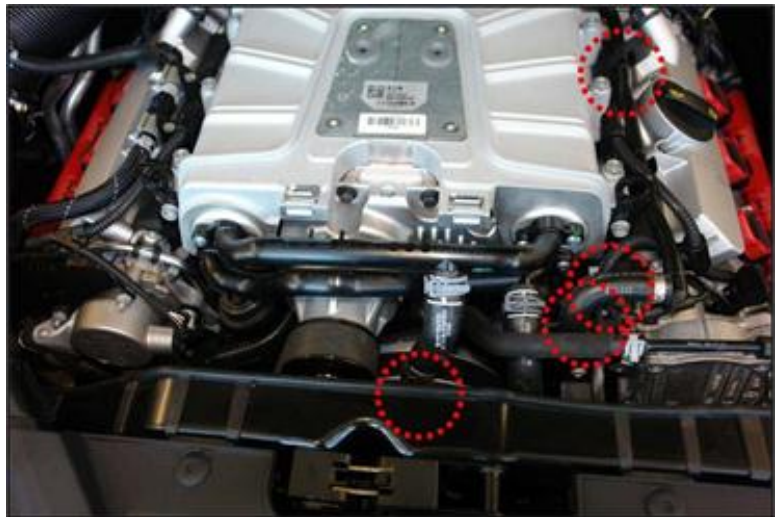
Screw to be removed from coolant line and upper section of oil pan (arrow)
